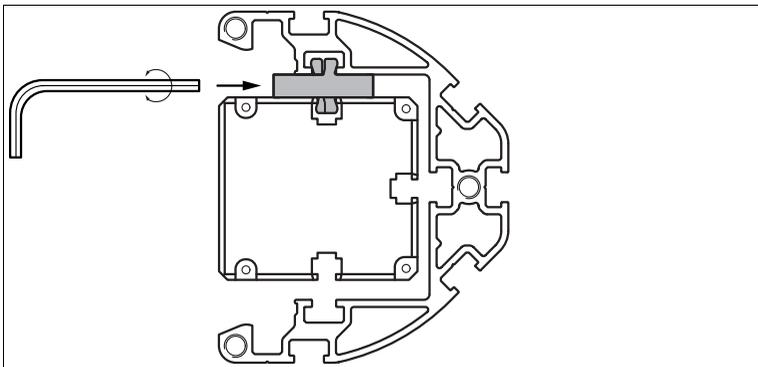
Assembling or disassembling using mounting aid OMH-SLCT-10 (using allen wrench SW3)
